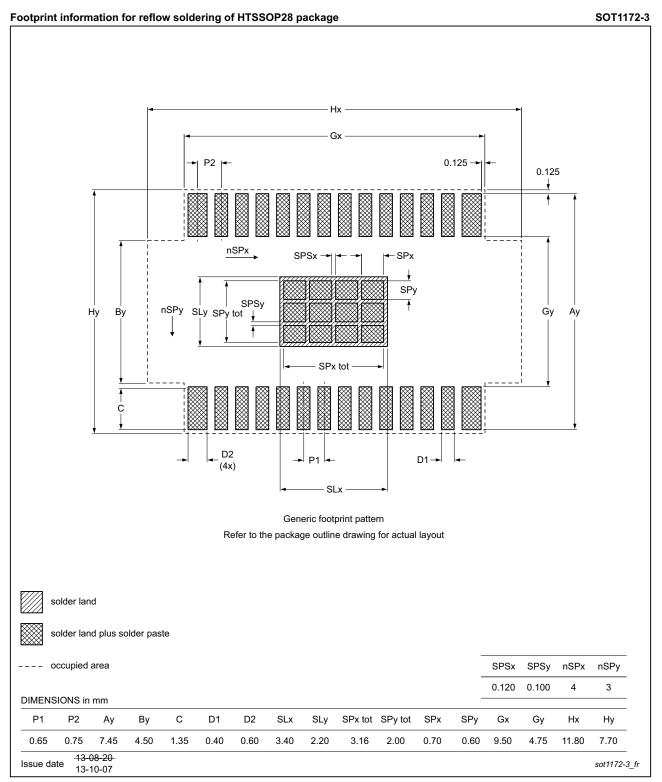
PCB footprint for SOT1172-3 (HTSSOP28); reflow soldering
